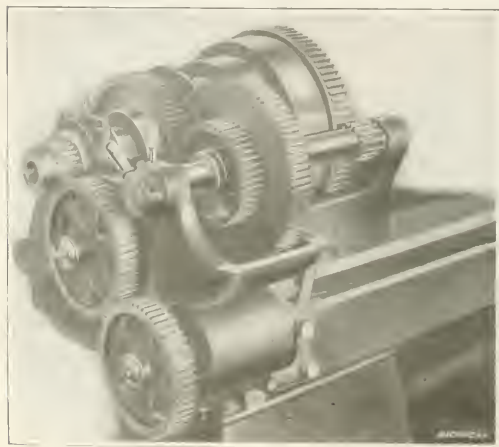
Close View of Head and Gear-box with Gear Guards removed
